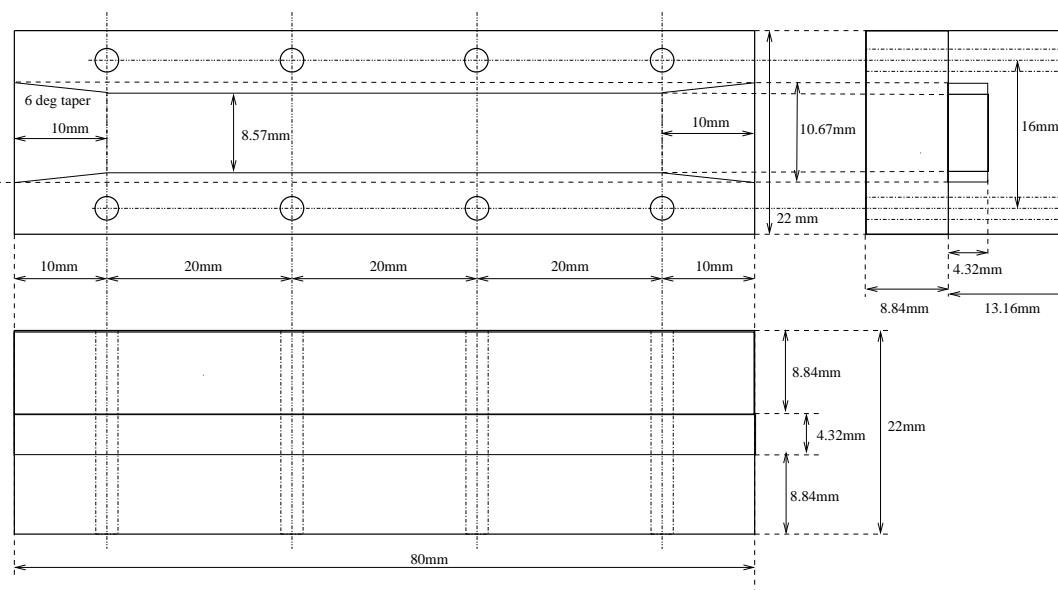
Mechanical drawing of the 17.5 GHz high pass image rejection filter. Two pieces of aluminium are bolted together to form waveguides with ends drilled and tapped to match standard WR42 waveguide flanges. A similar design was used for the 11.5 GHz image rejection filter where the dimensions were scaled accordingly.
